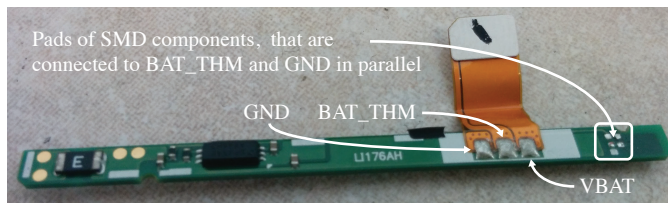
This is the circuit board from the battery. It contains two SMD components that we extract and directly solder between BAT_THM and GND on Nexus's motherboard.
